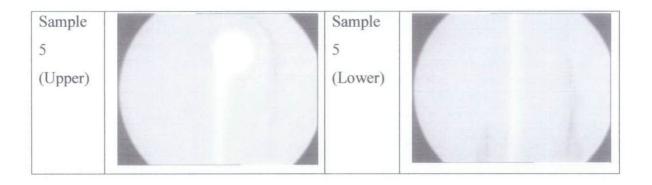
Sample 5, FSW plates (Rectangular tool, 50 mm/min)
